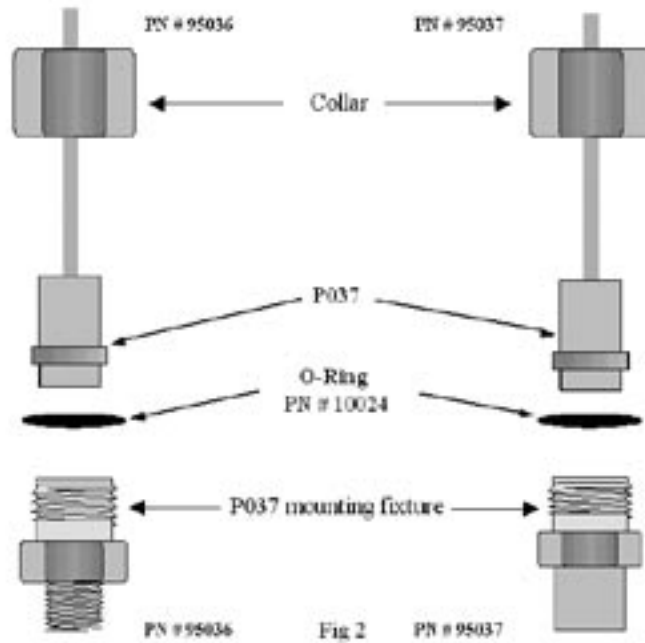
Mounting fixture: #95036 - 1/4-18 NPT male process connection, # 95037- weldable tube stub
